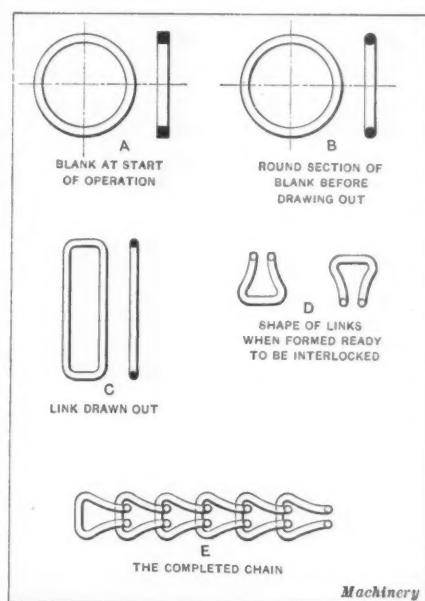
Operations involved in the Manufacture of Weldless Chain
